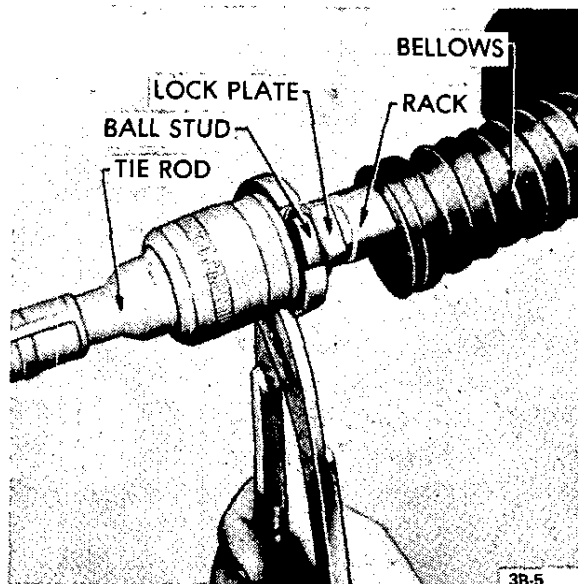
B-5 Bending Lock Plate Over Ball Stud . GT
